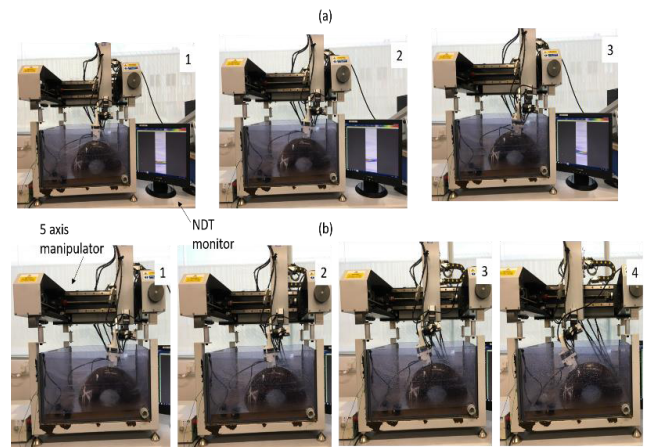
(a) Inspection example – cross section of the chain. (b) Inspection example – across the chain crown surface.
